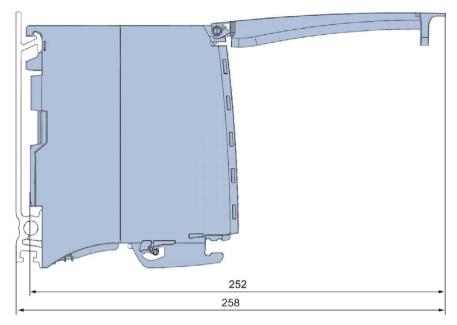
Dimensional drawing of the DI 32x24VDC BA module, side view with open front cover
